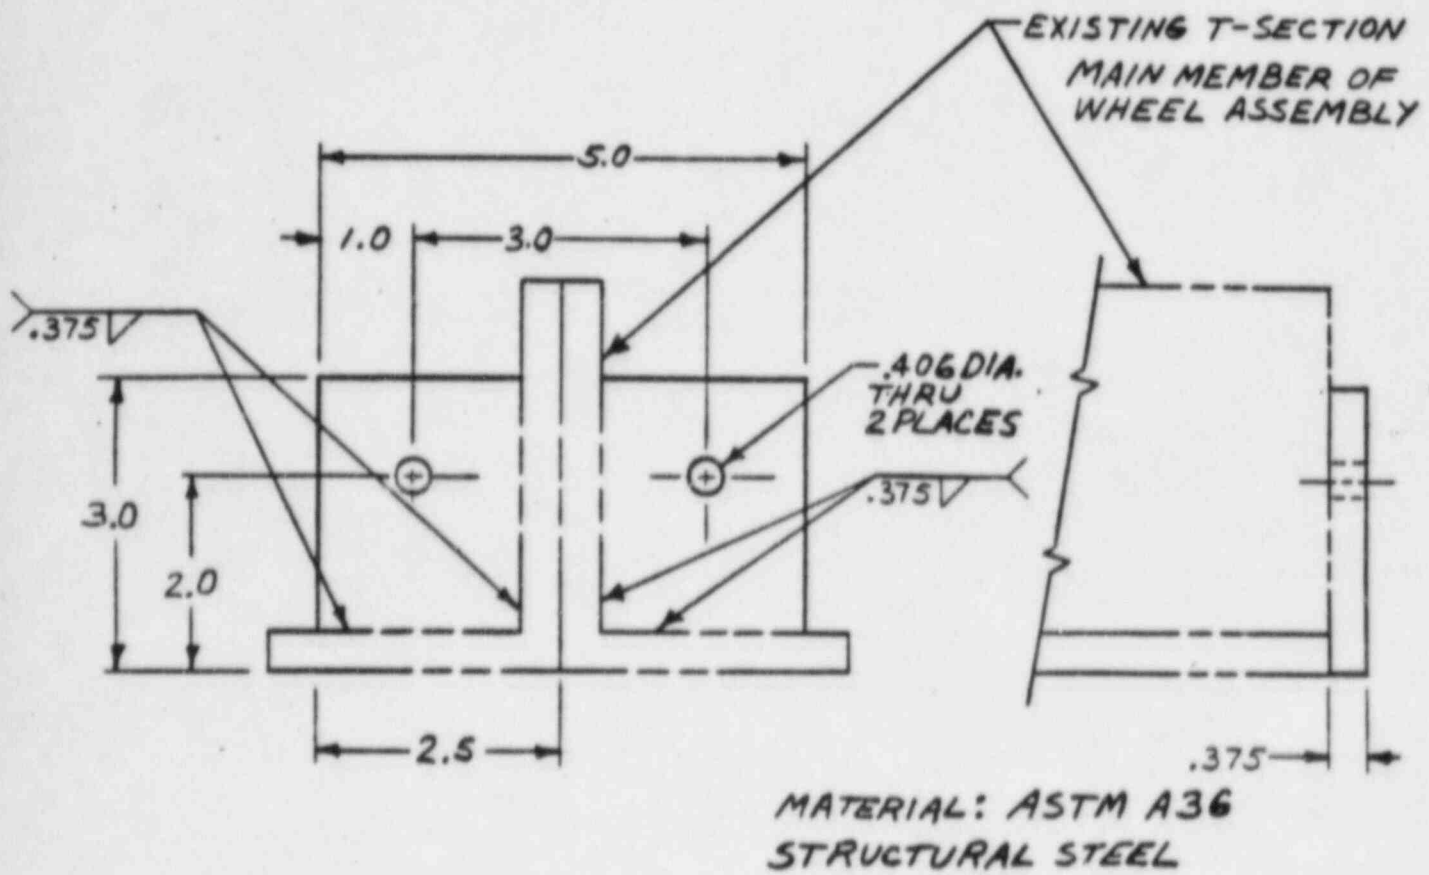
ANCHOR BRACKET TO WHICH ANCHOR ANGLE ASSEMBLY IS BOLTED
